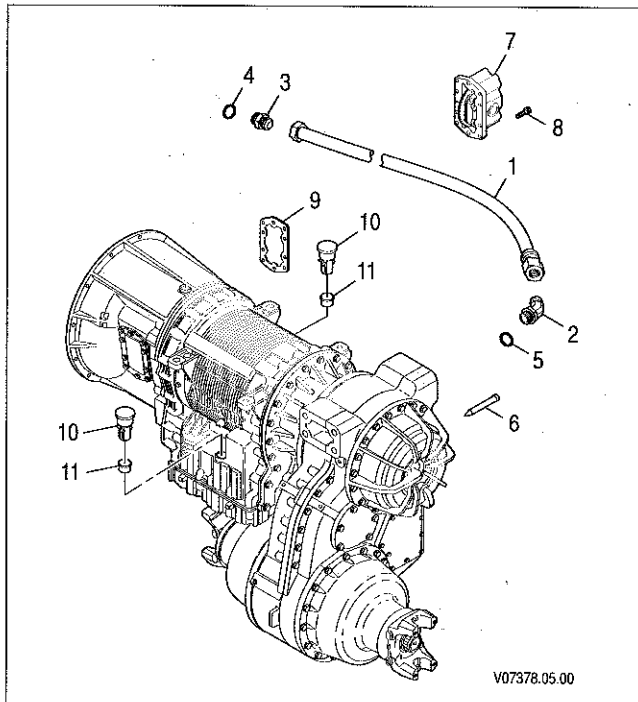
3700 SP and MD 3070PT Scavenge Pump Removal
